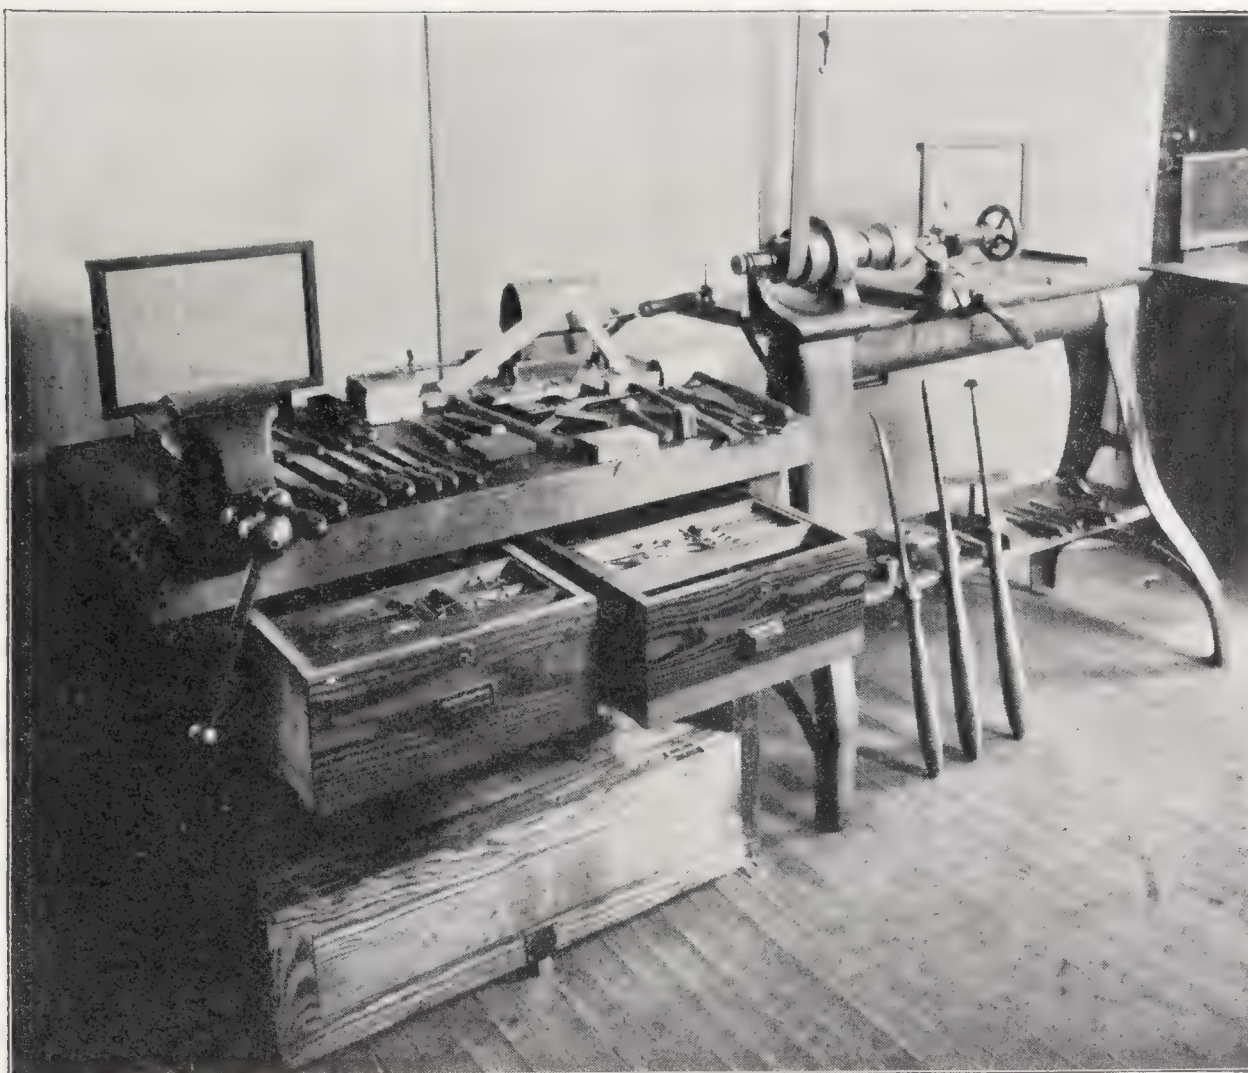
METALWORKING ROOM—UNIT OF EQUIPMENT.
